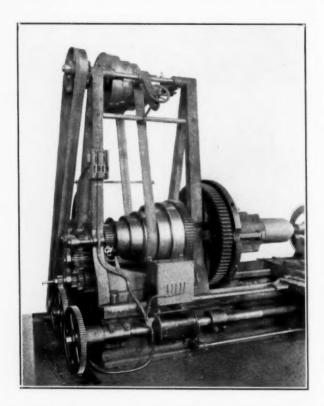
42-in. Miles-Bement Lathe Driven by Constant-Speed Motor' Using Cones and Belts
